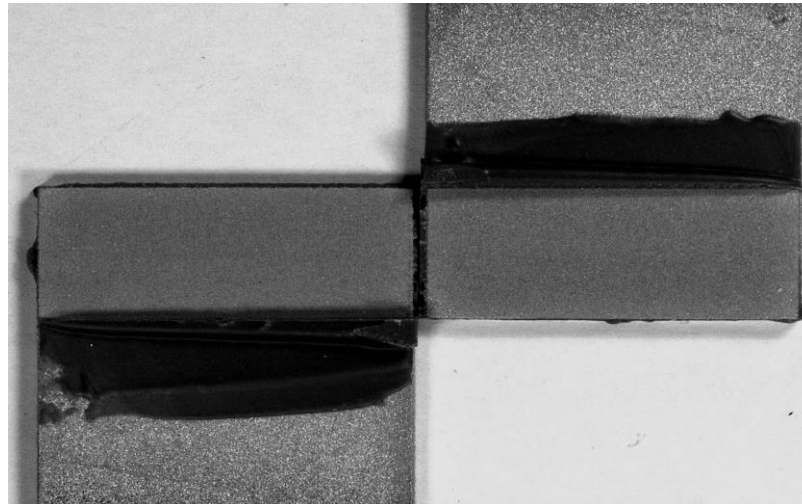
Typical fracture surfaces of the sand blasted single –lap joint aged under 70°C and 75%RH at 15% load of initial strength.
